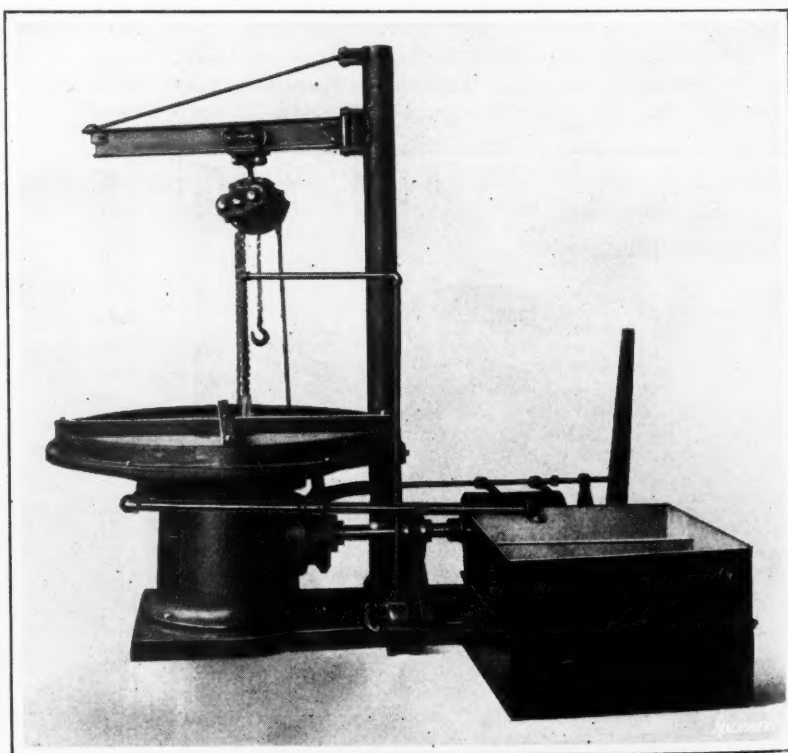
Besly Horizontal Disk Grinder equipped for Wet Grinding
